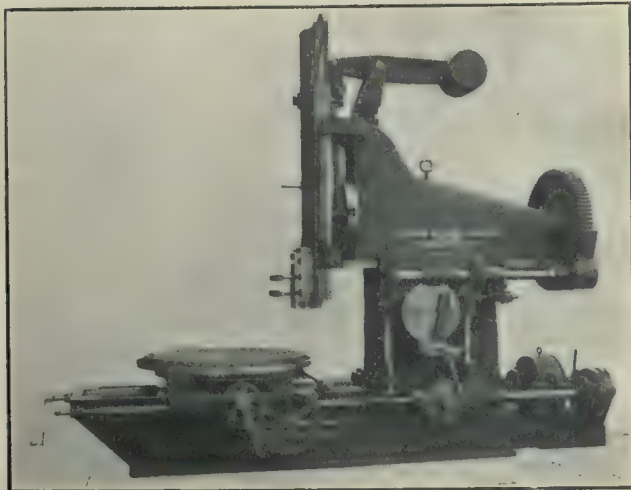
Improved Slotter Made by London Machine Tool Co., Hamilton.
